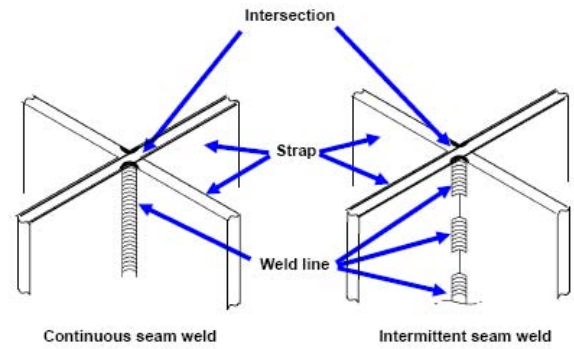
Weld line for the proposed LASER welding techniques
